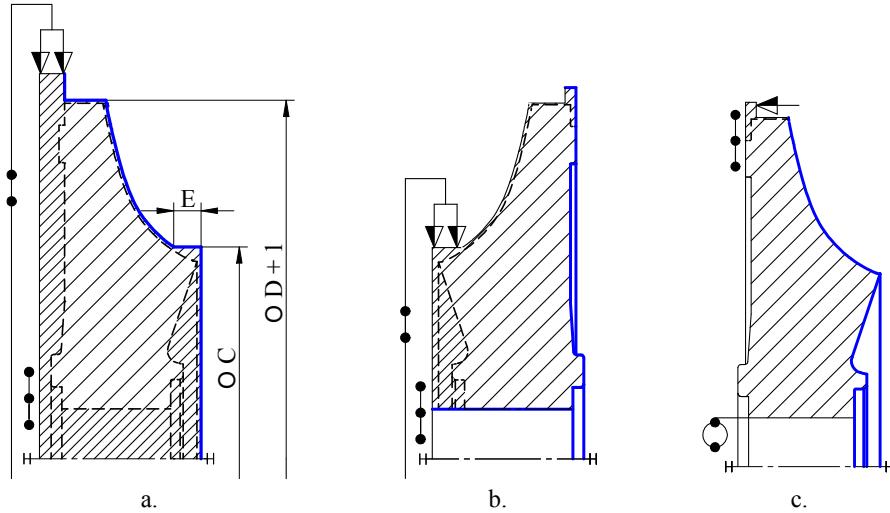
Rotor turning phases: front face roughing (a); rear face roughing and finishing (b); front face finishing (c)
